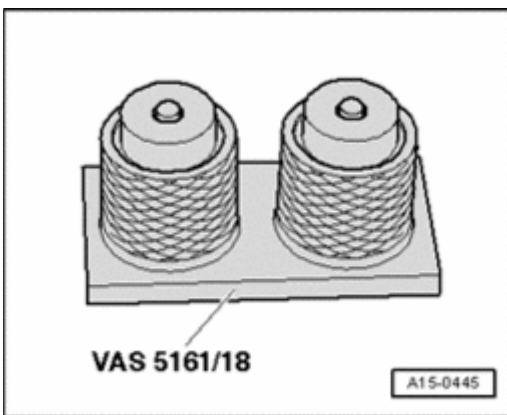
Identifying Installation Cartridge VAS 5161/8
